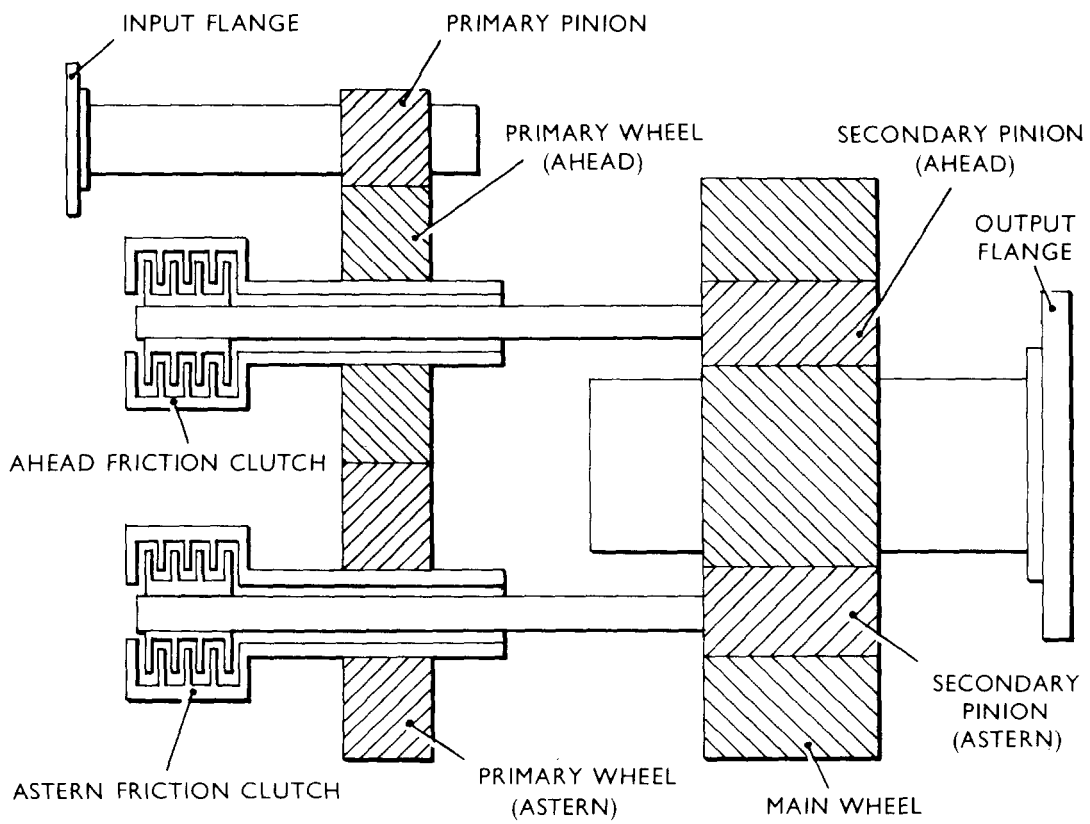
SIMPLE GEARBOX USING FRICTION CLUTCHES
